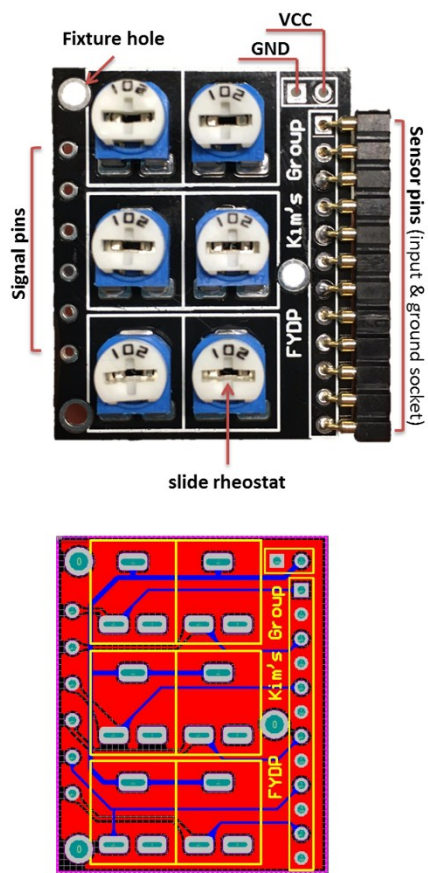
Photograph of custom-designed printed circuit board (PCB)
